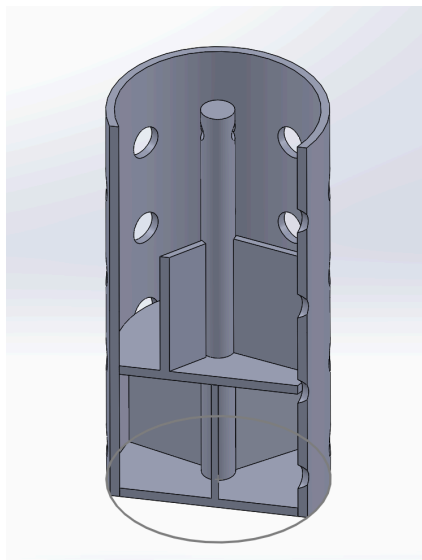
Isometric view of the addition holder. This part is slid over the rod in the center.
